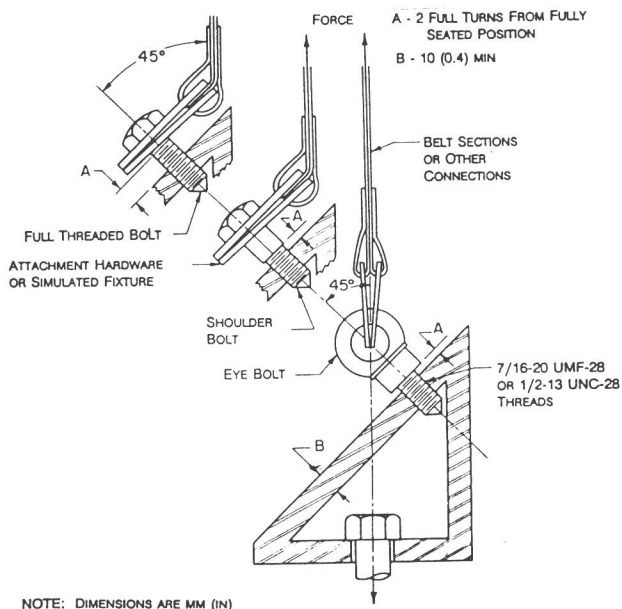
ATTACHMENT HARDWARE TEST FIXTURE
